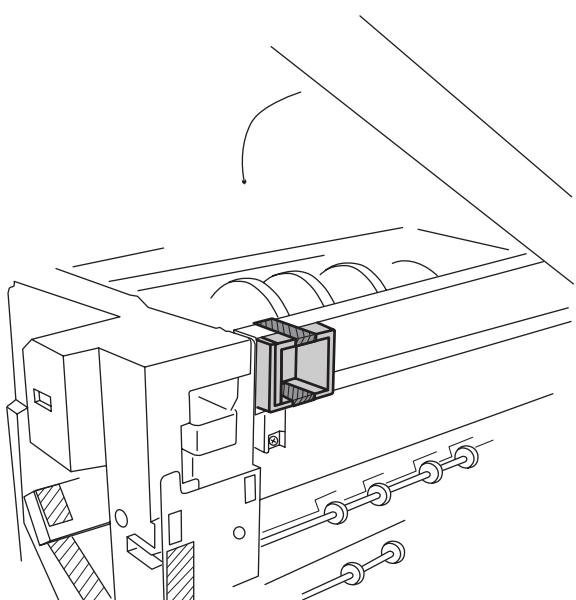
through -3 show the locations of packing materials used inside the finisher. Locate and remove them.
